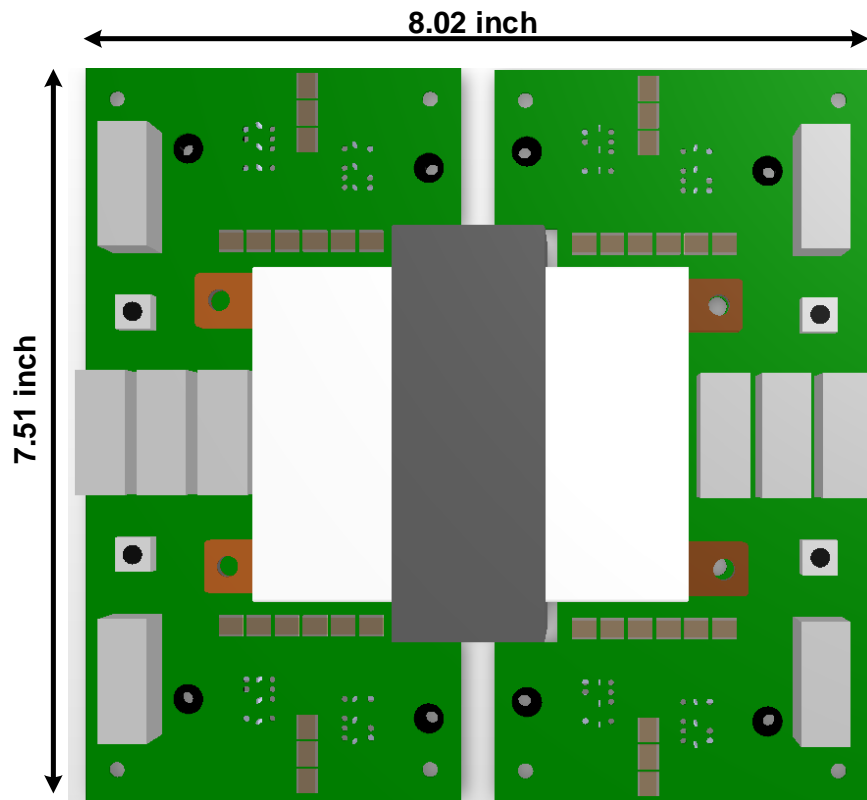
3D rendering of converter assembly without gate-driver board.
